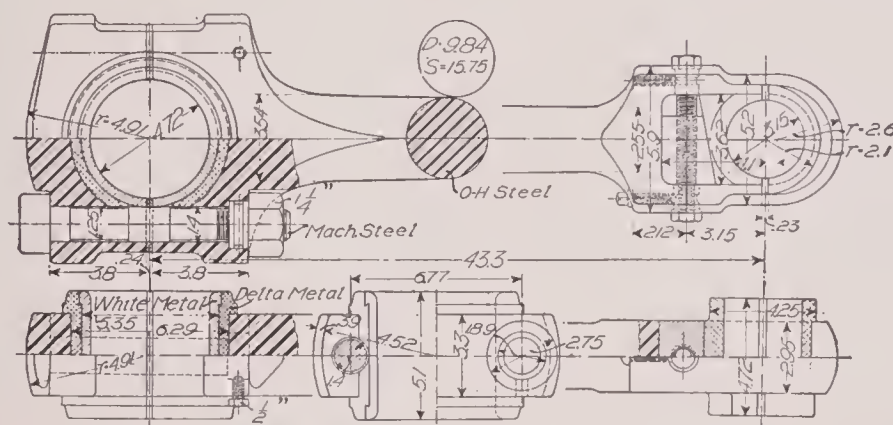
Connecting Rod for a 6 H.P. Bánki Engine.
